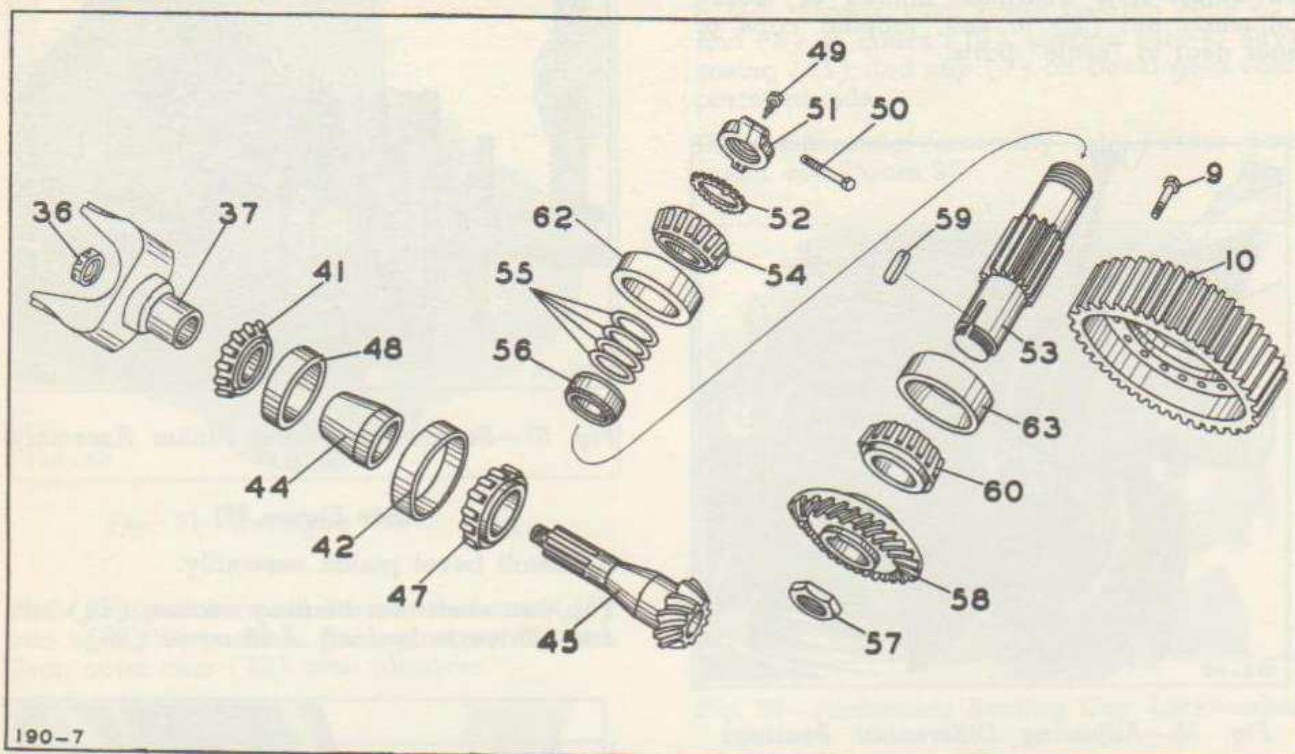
Exploded View of Gear and Bearing Parts of Rear Axle Drive Unit
